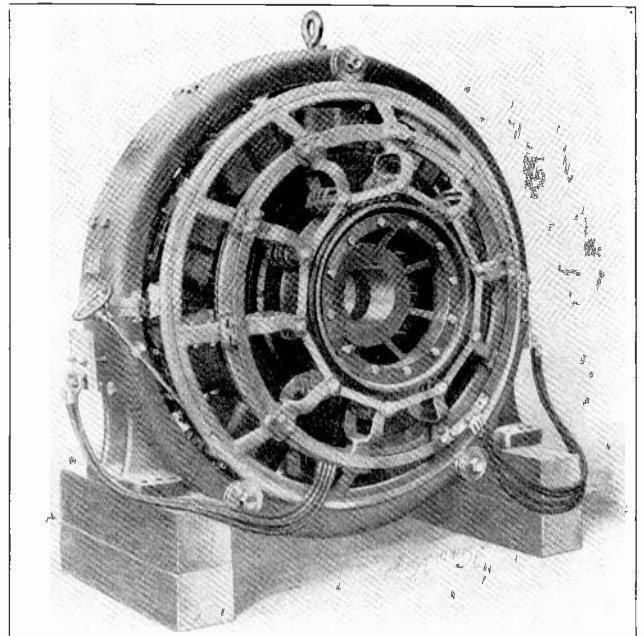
This end view of a generator with the pedestals, bearing, and shaft removed shows very clearly the brush ring mounted in grooved rollers on the side of the field frame. The hand-wheel at the left can be used for rotating this ring to shift the brushes to the proper neutral plane.
